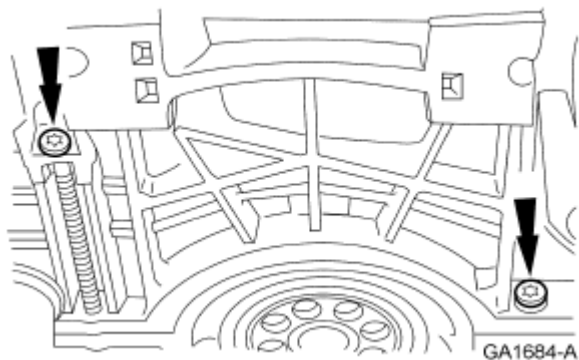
Locating Cylinder Block Cradle Torx® Bolts
